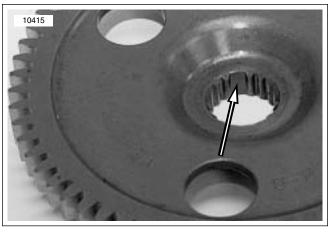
Counterbalancer Gear Master Tooth Flat
